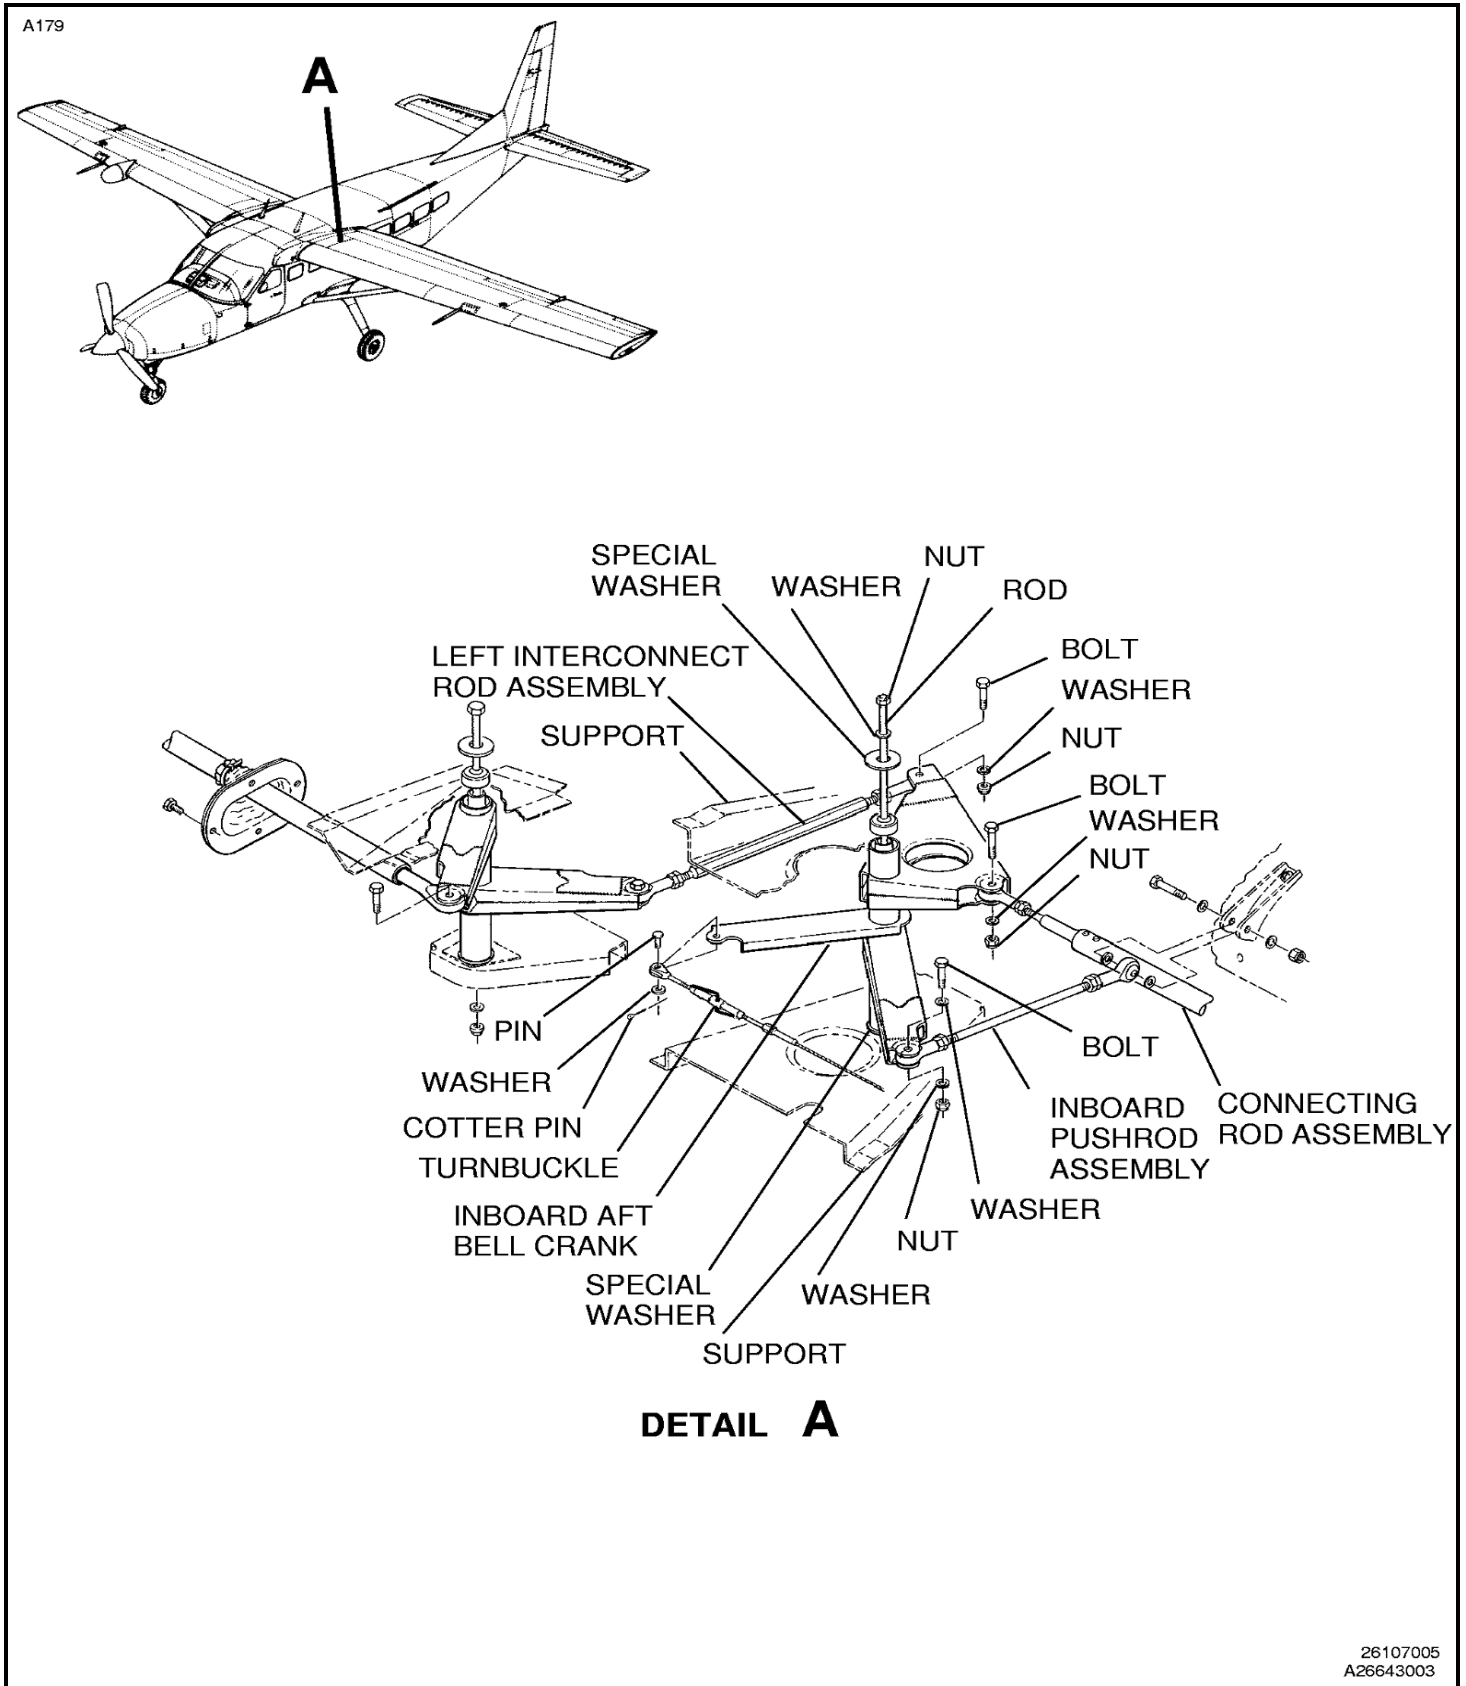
Sheet 1 : Flap Outboard Bell Cranks
